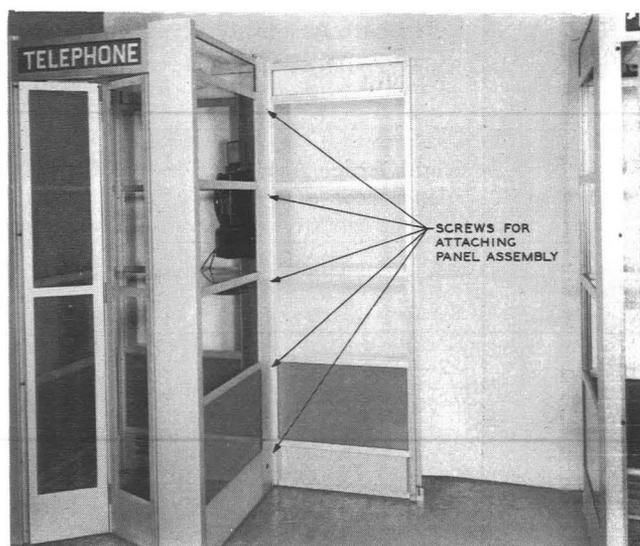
LEFT REAR PANEL ASSEMBLED
